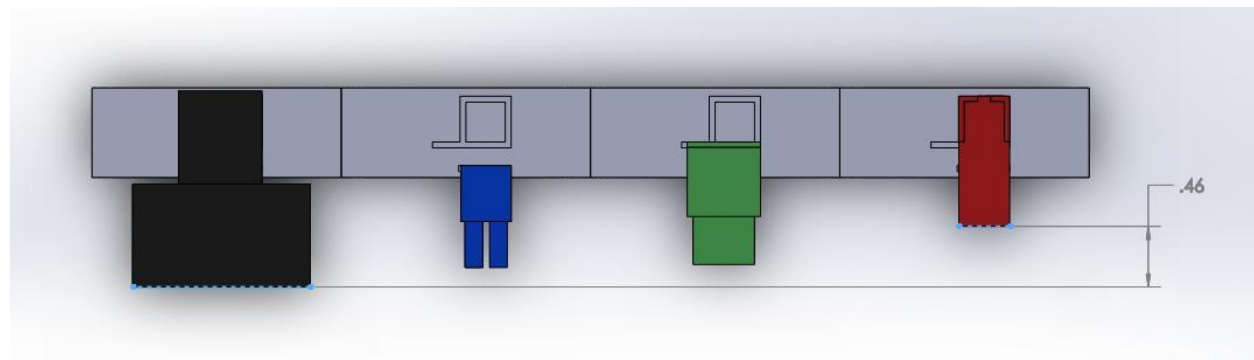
Alignment of Plug Faces When Fixed in Tooling
